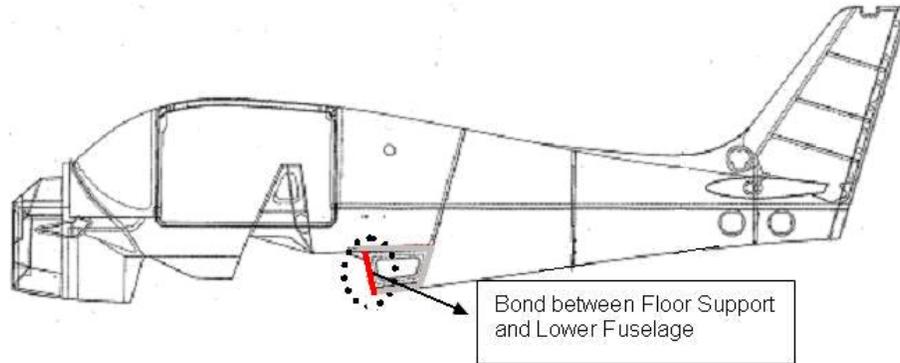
Inspection Location Between The Bonded Sections Of The Baggage Bay Floor
